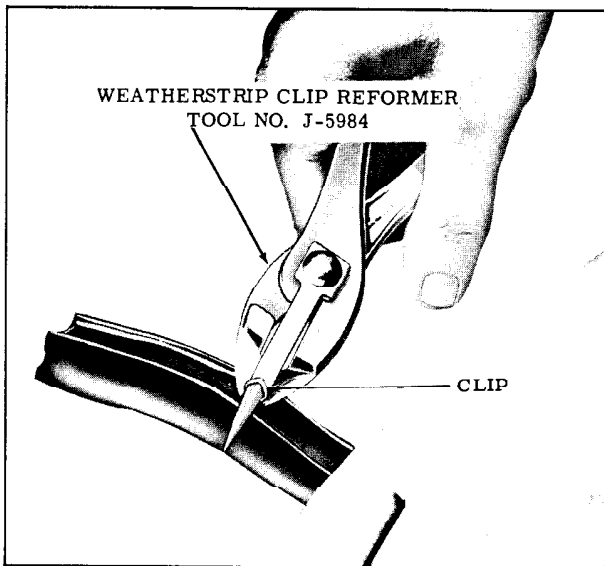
Reforming Weatherstrip Clips with Tool J-5984
